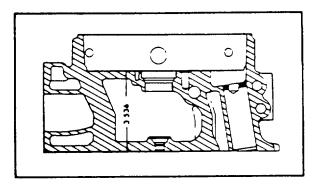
Minimum Distance Between Top and Bottom Faces.
